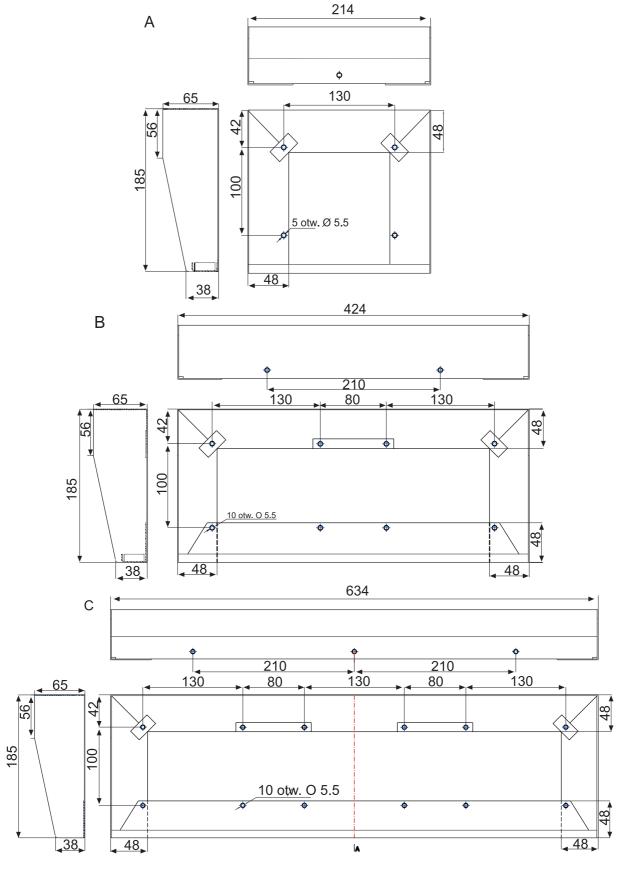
Dimensions of casings mounted on plaster in horizontal arrangement, for panels ${\rm CP\text{-}2501xx}$
